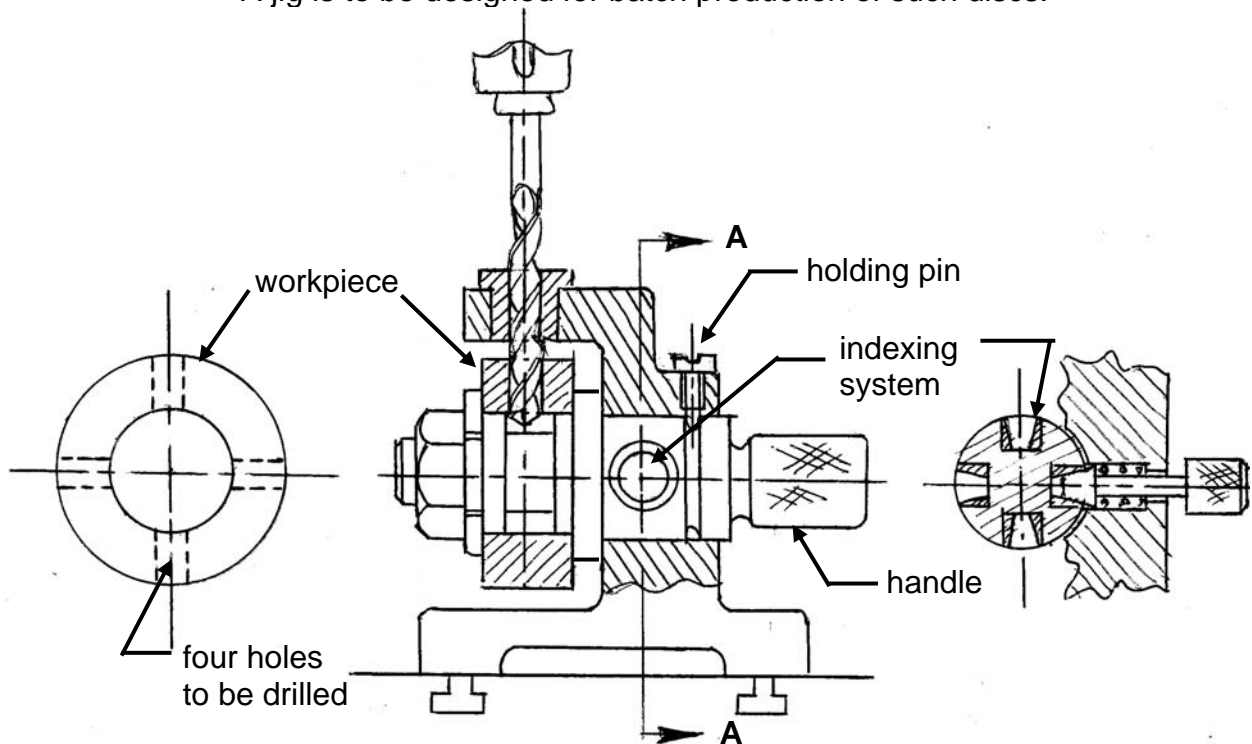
Jig for drilling four equispaced through radial holes in a ring.
